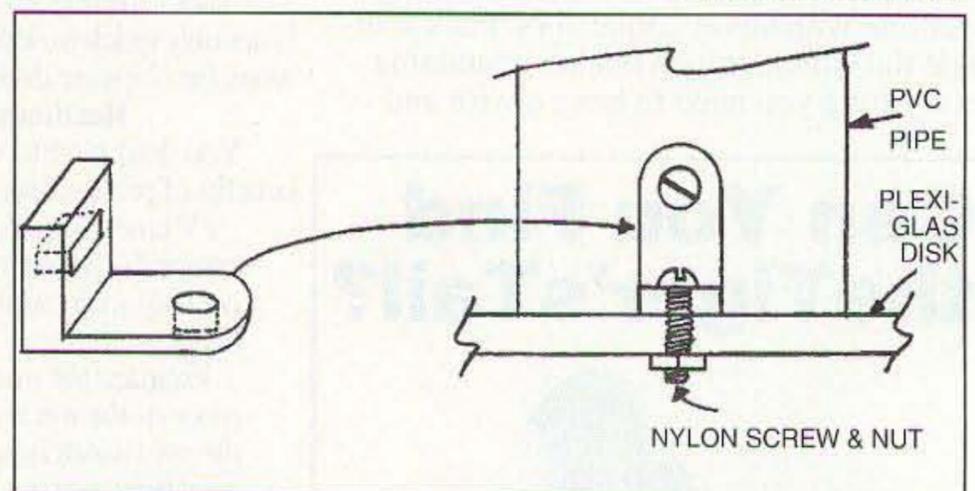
"L" shaped bracket to attach PVC pipe and coffee can to Plexiglas disk.
